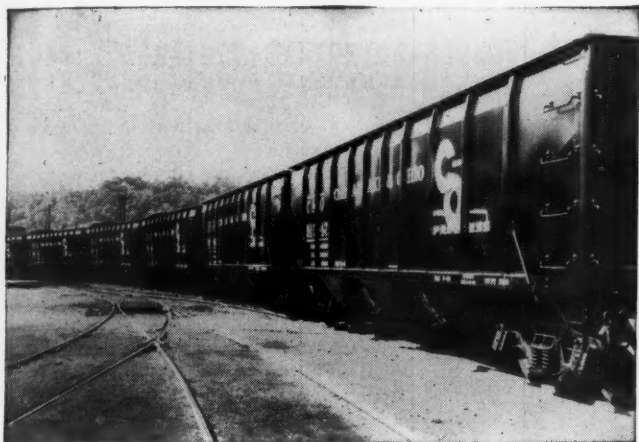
Part of 25 arc welded steel hopper cars turned out daily by the American Car and Foundry Co., Huntington, W. Va., for the Chesapeake & Ohio Railroad.
